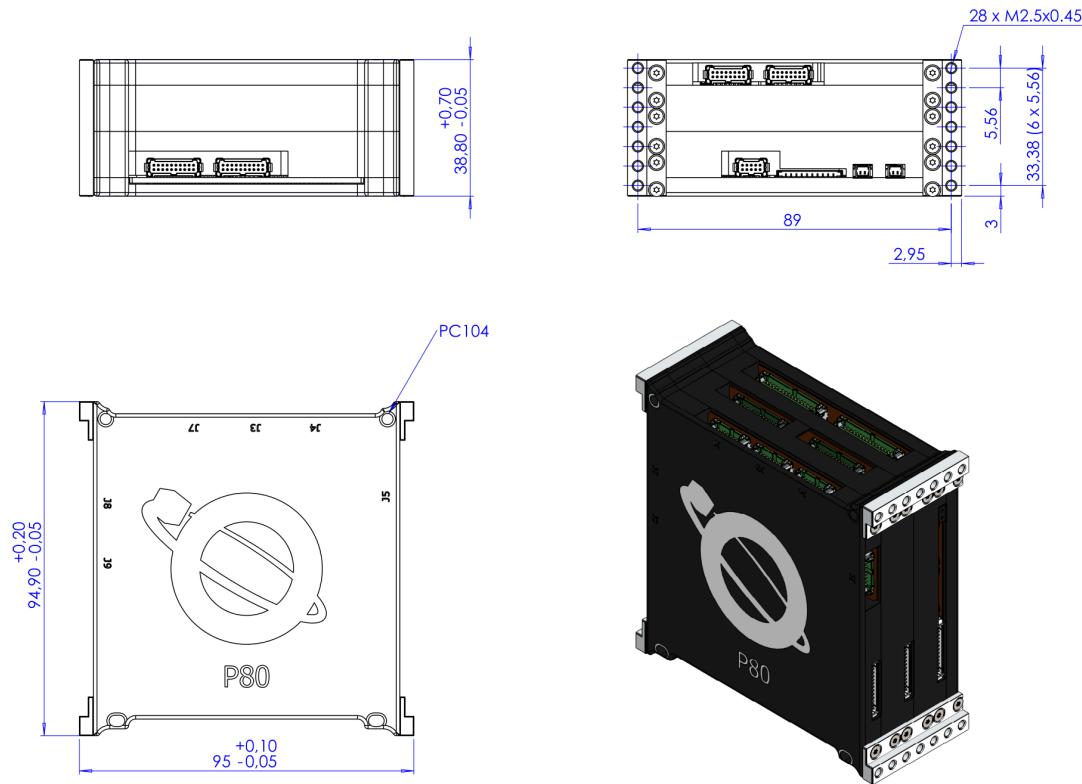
Mechanical drawing of the standard P80, 1xPMU 1xACU 1xPDU.
